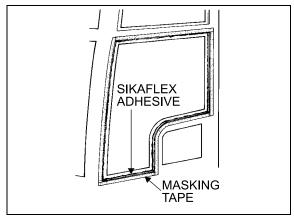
ADHESIVE-MOUNTED WINDOW
